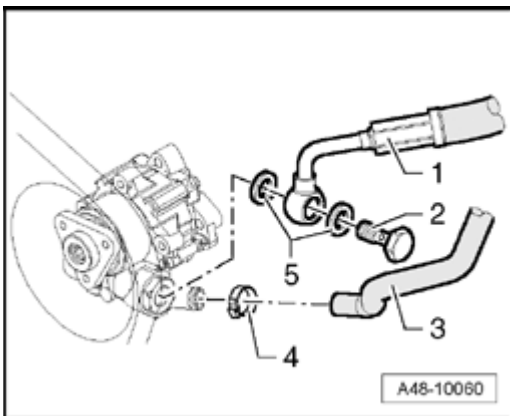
Identifying Banjo Bolt, Pressure Hose, And Seals
